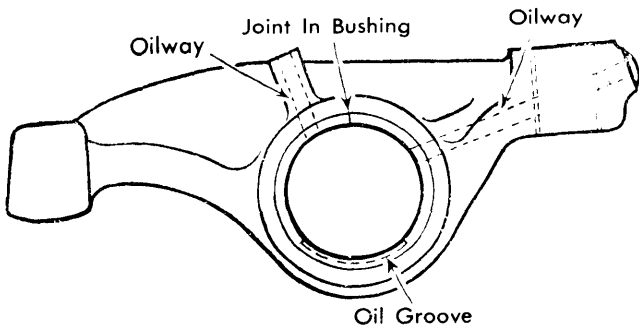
Rocker Arm Bushing with Detail of Oil Holes
